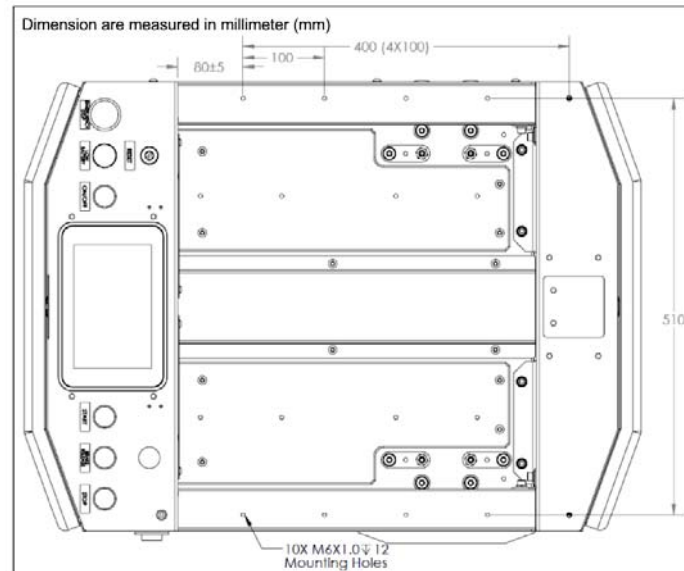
Payload Handling Module Mounting Holes for Zalpha
